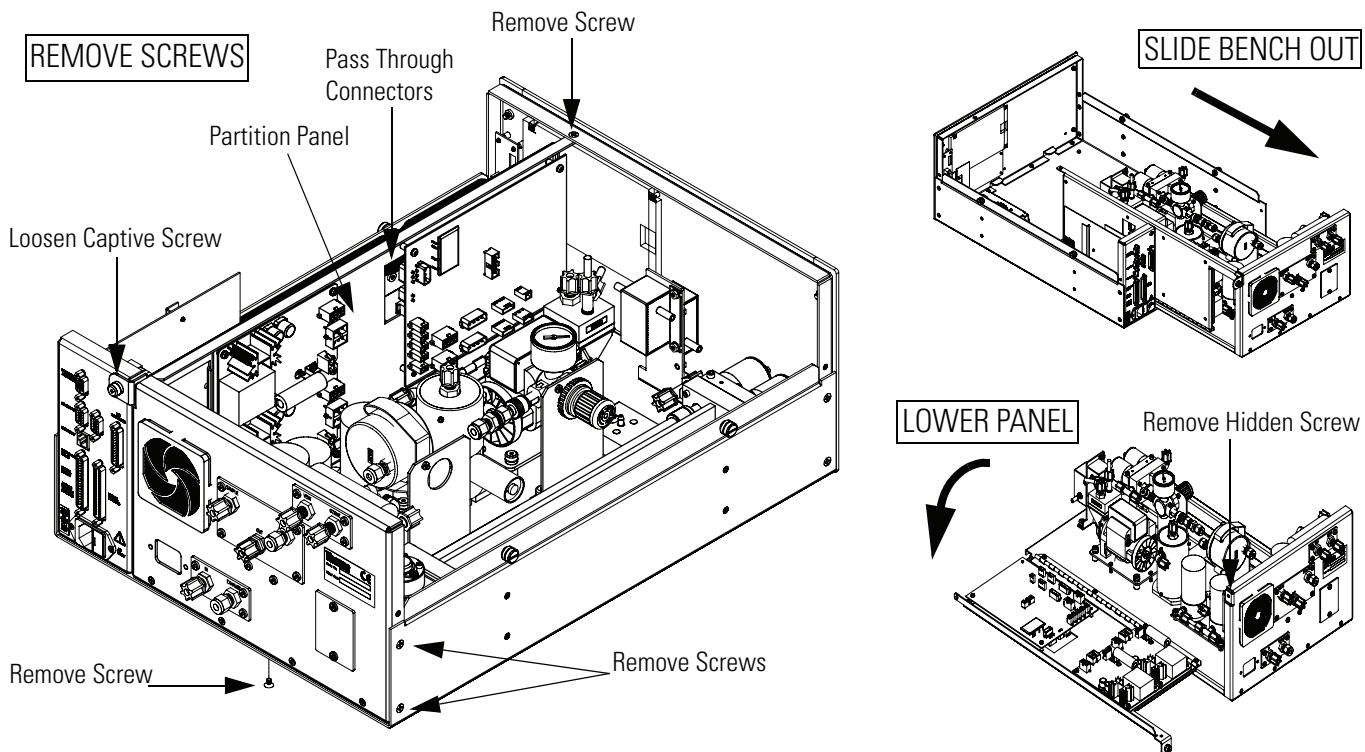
Removing the Measurement Bench and Lowering the Partition Panel
